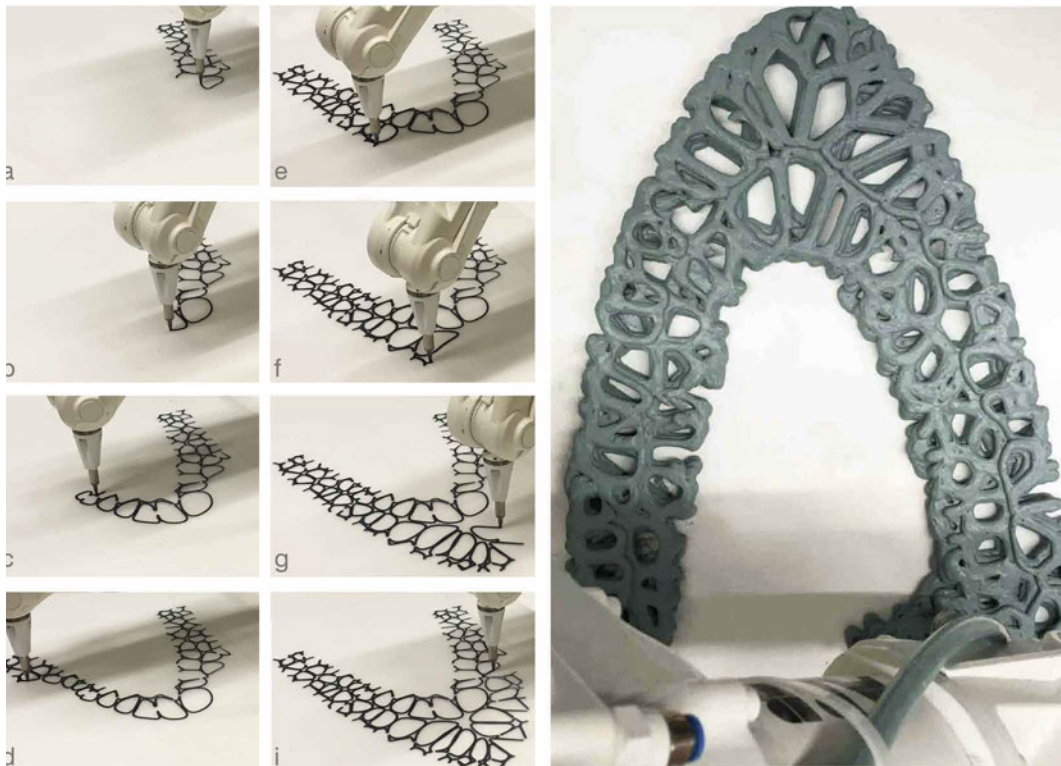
Left: Test of the material deposition method (left), robotic 3D printing of the one-to-one prototype (right).
